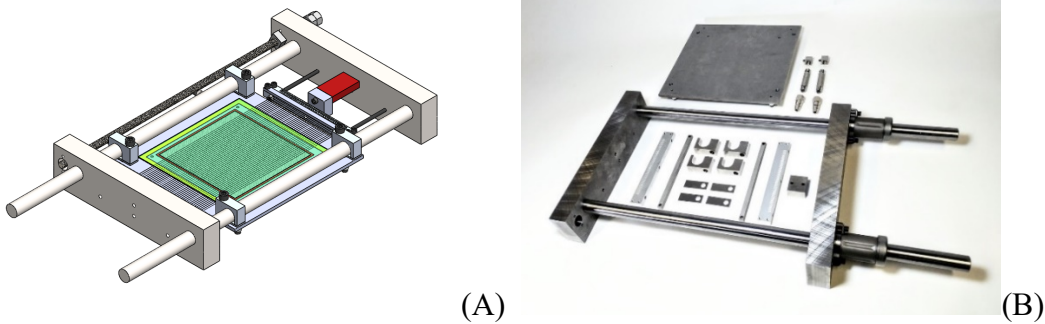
SMAHC Manufacturing Fixture CAD (A) and Parts (B)
